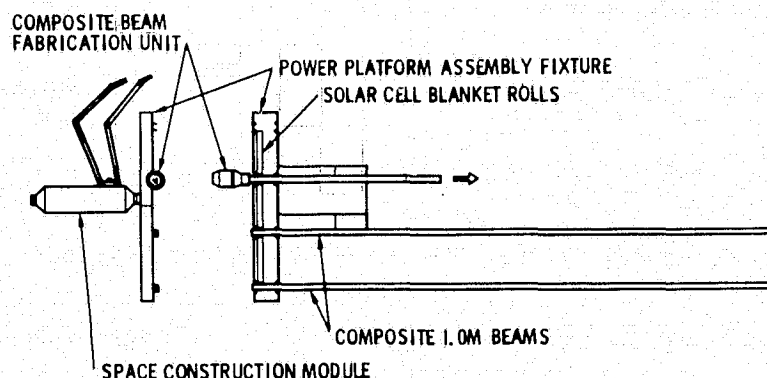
Ladder-Concept Longeron Beam Fabrication Power Platform Construction
